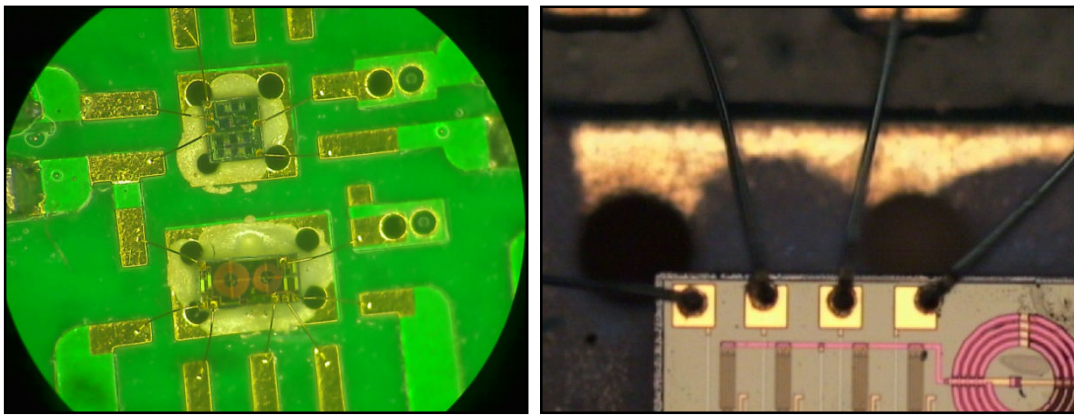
Wirebonded Dies and 1 mil Gold Wire
